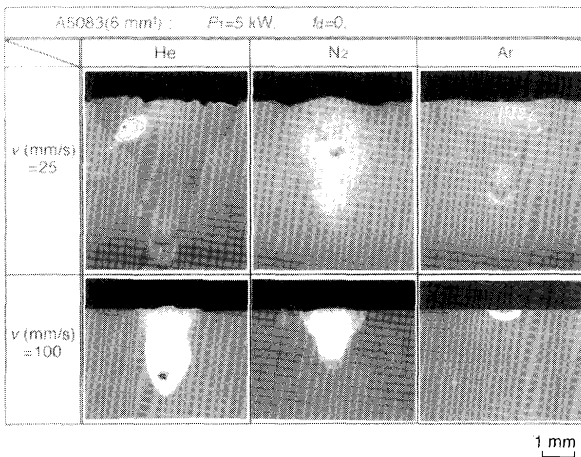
Cross sections of CO₂ laser weld beads of A5083 produced in He and N₂ shielding gas, showing the effect of gas kind on penetration.
